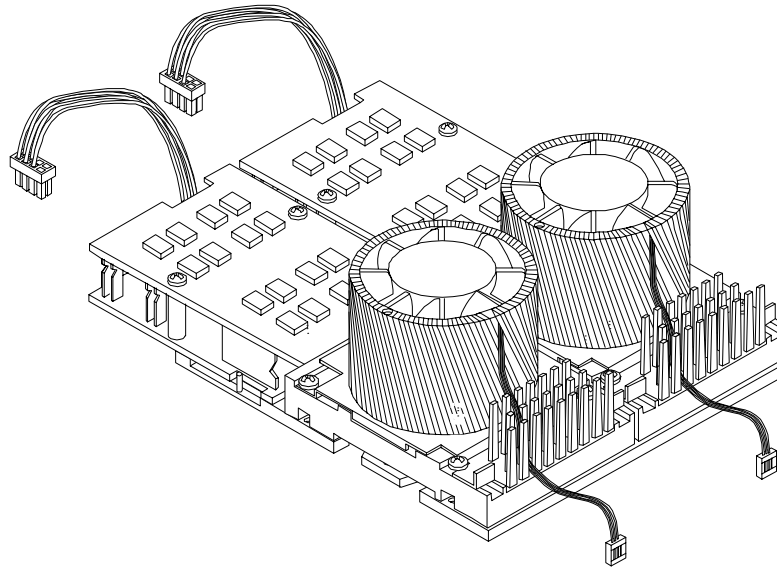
Install the Processor Module Power Pod Mounting Screws
